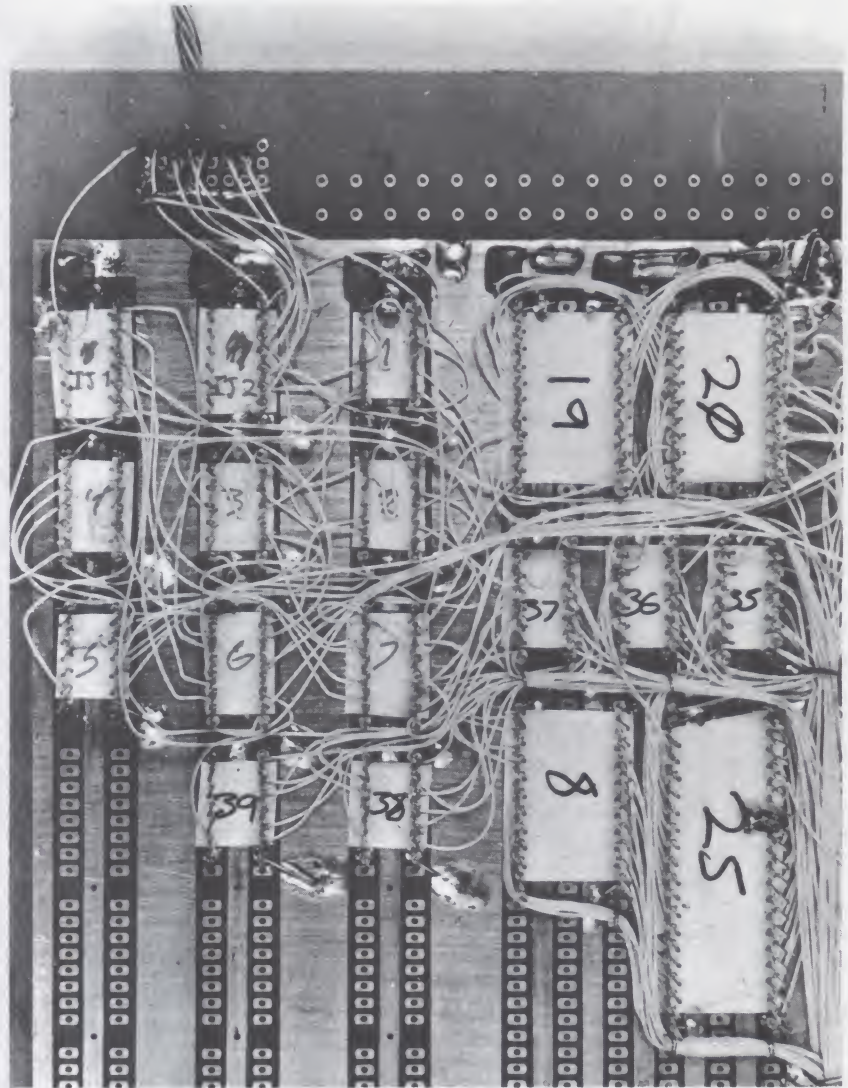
Detail illustrating wire wrapped assembly of figure 2 using a general purpose prototyping board.
